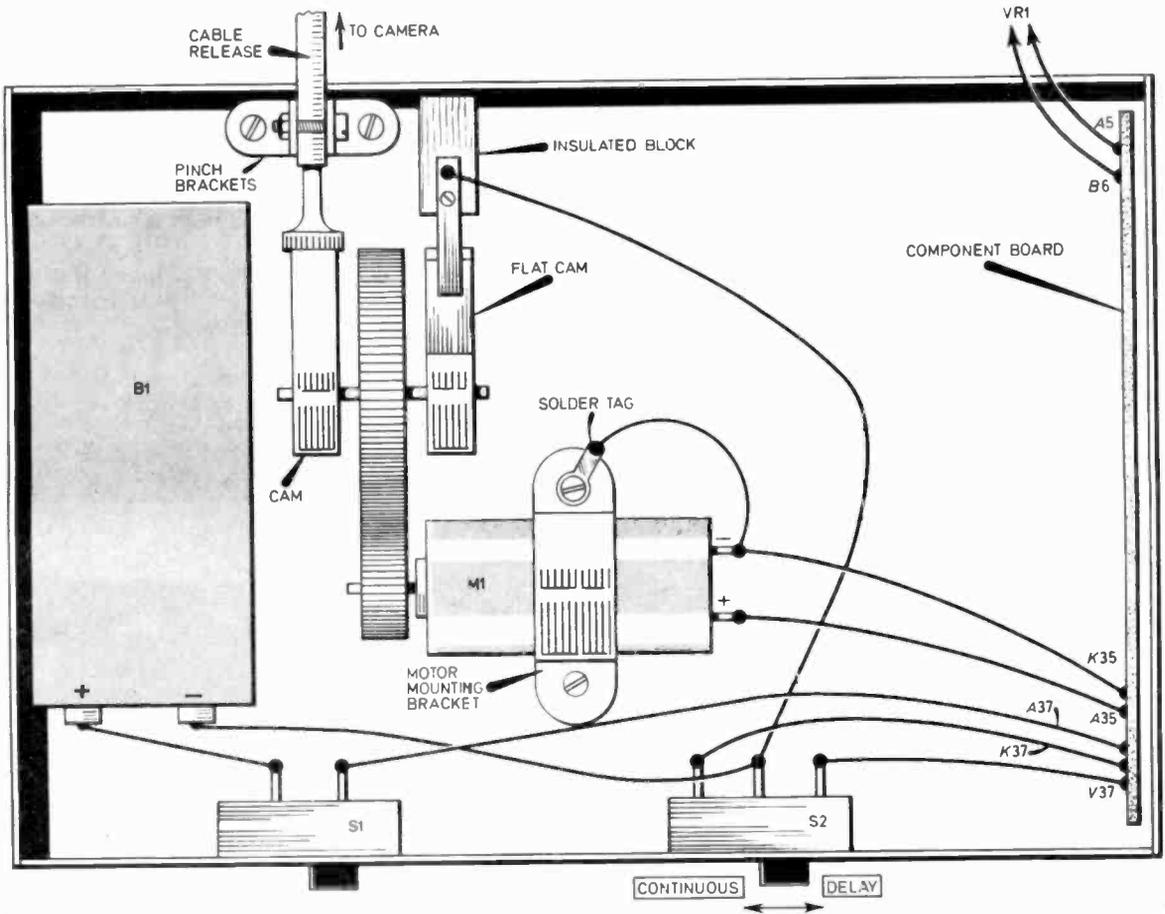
Details of the pinch brackets, gearing and cam arrangement. For simplicity, only a two cog gear system is shown.
